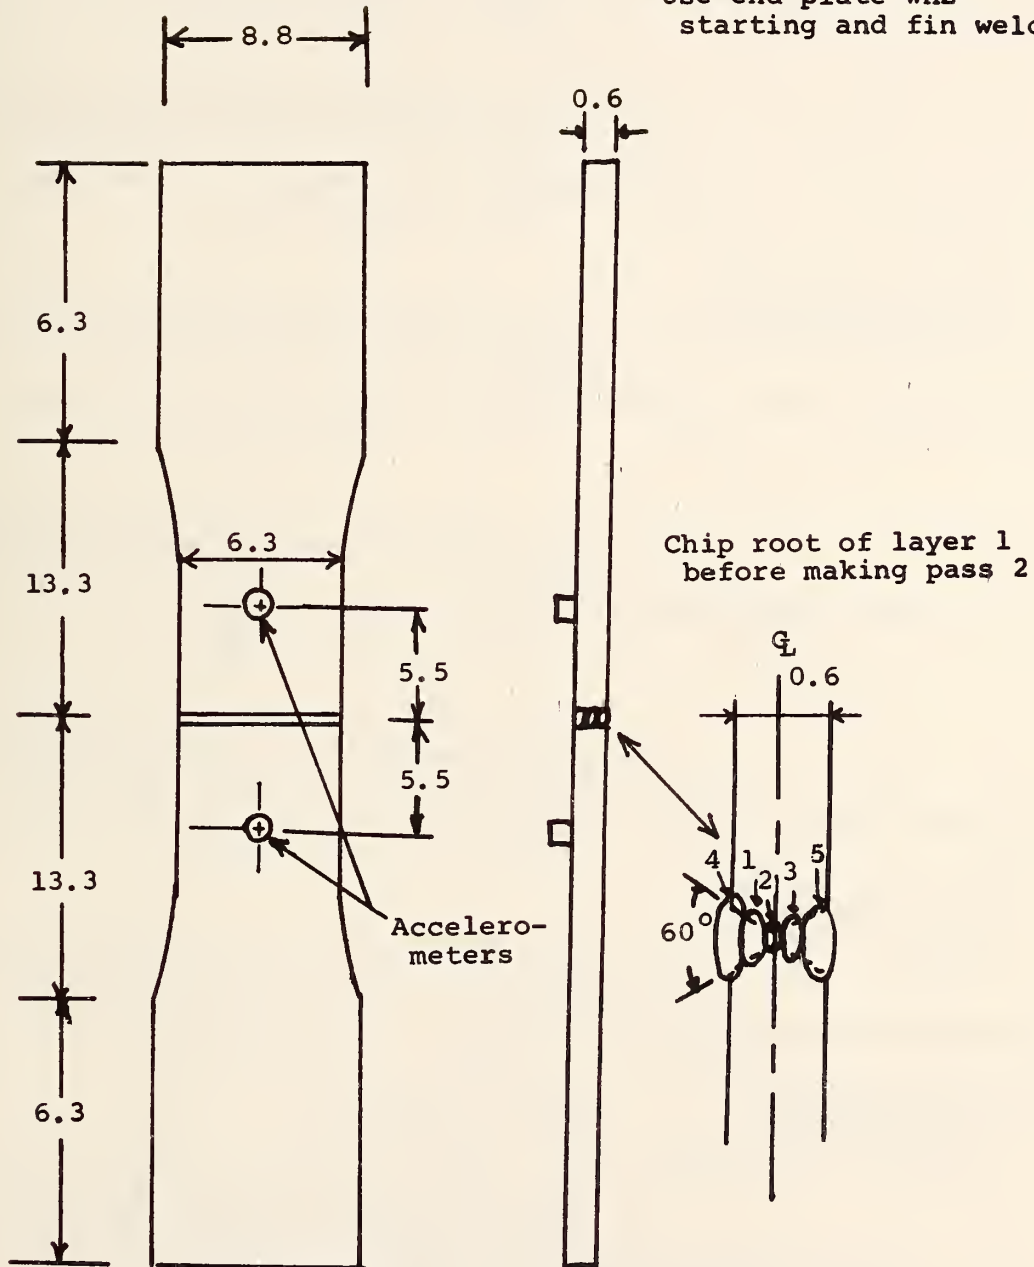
LABORATORY SPECIMEN WITH BUTT WELD.
